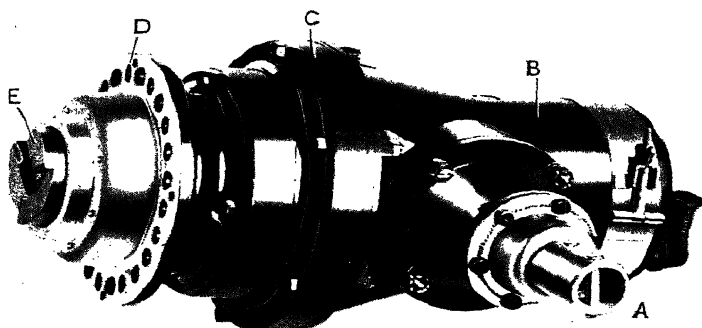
The Rotax-Eclipse direct cranking electric starter.
